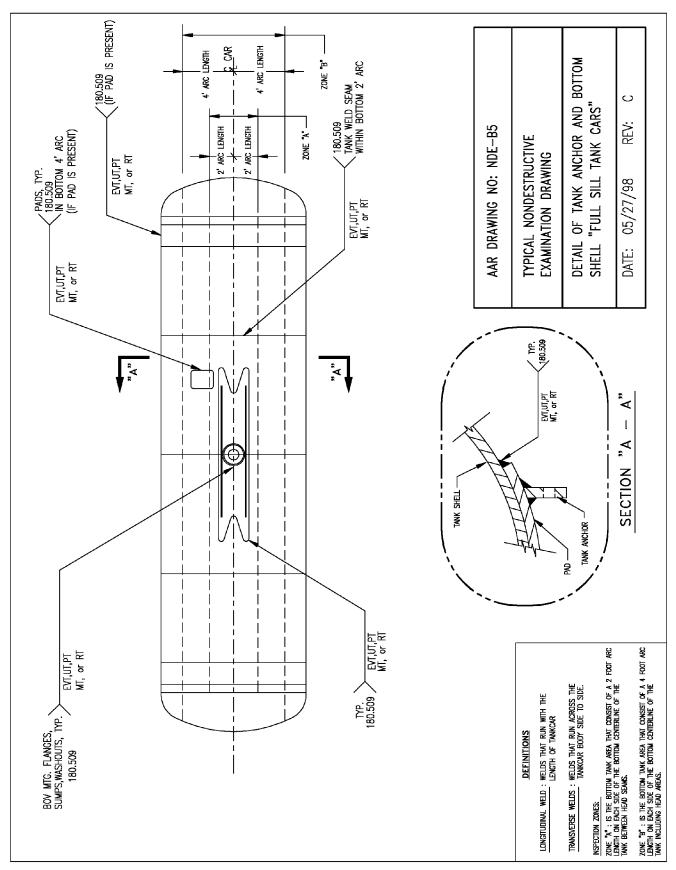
AAR Drawing No. NDE-B5 Detailing the Tank Car Anchor and Bottom Shell "Full Sill T
